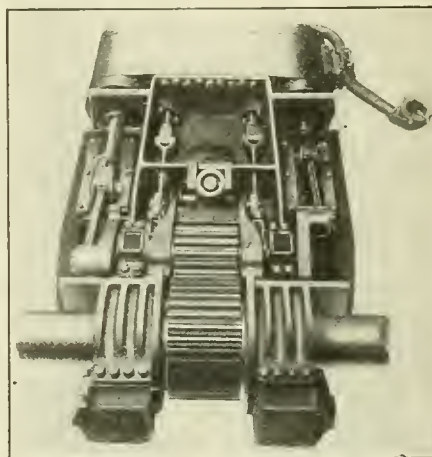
TWO-CYLINDER ENGINE GEARED TO THE TRAILER AXLE
